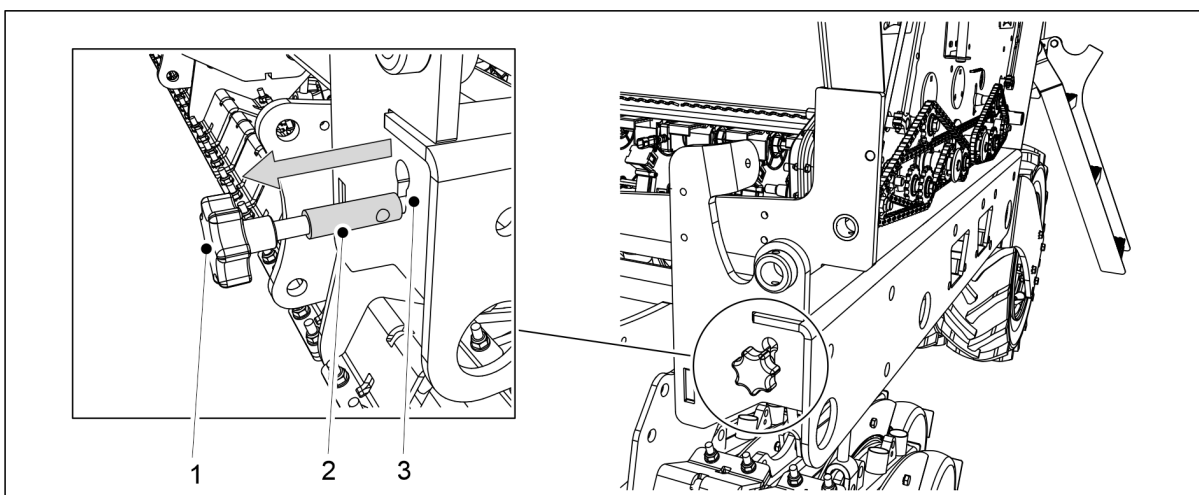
146. Pulling out the calibration test adjuster rod
